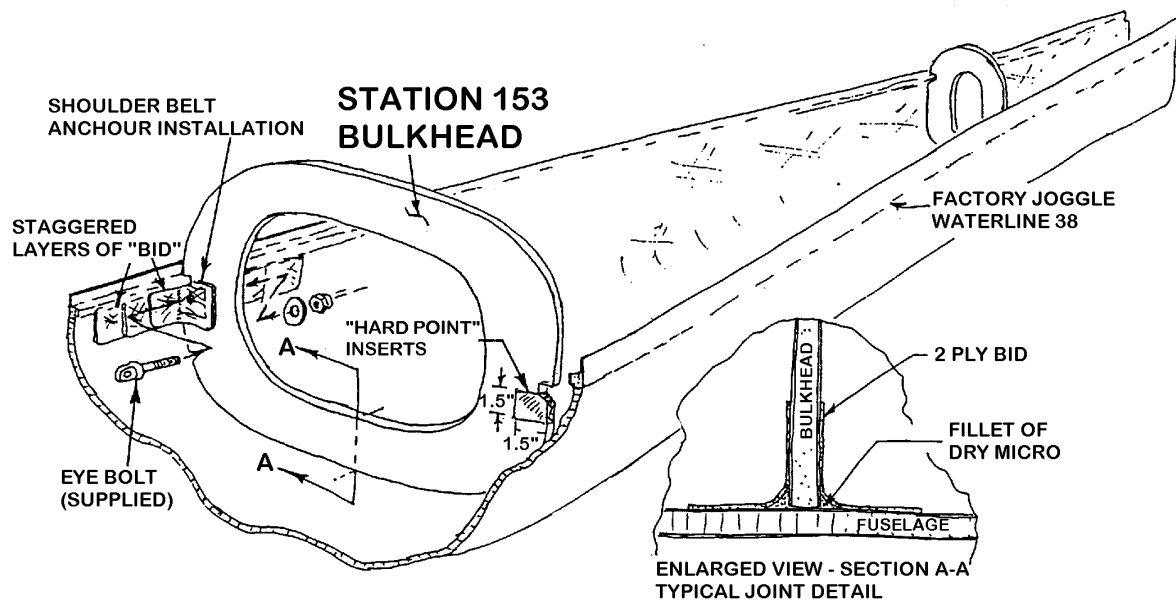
bulkhead installation. (With shoulder belt attache points)
